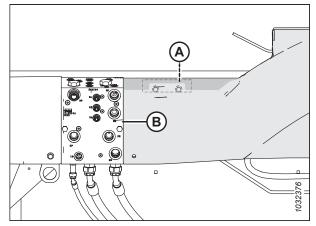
Left Outboard Linkage Cover – View from Rear of Header
